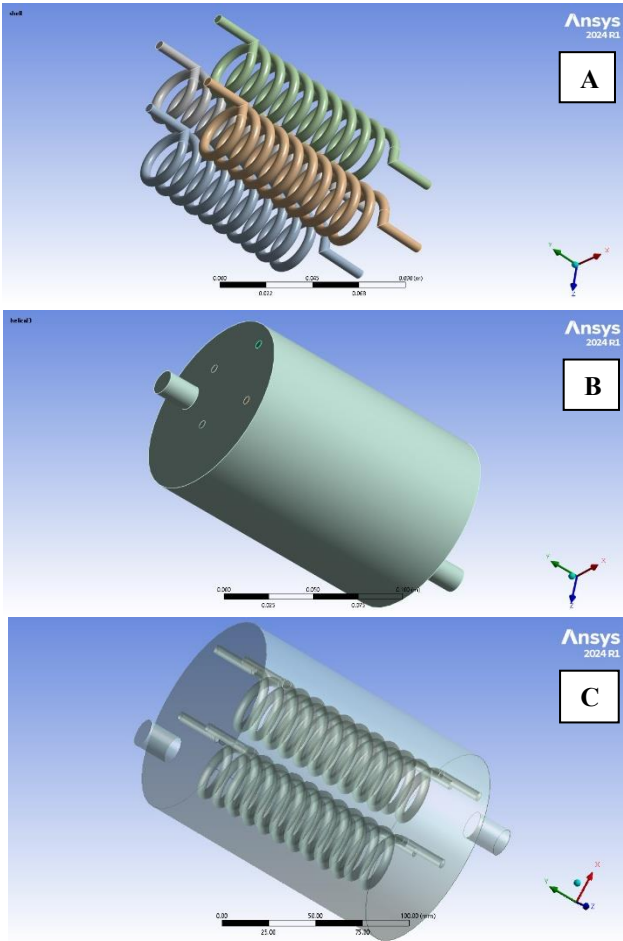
ANSYS modeler geometry design (A) helical coils design, (B) shell design, (C) helical coils and shell assembly
